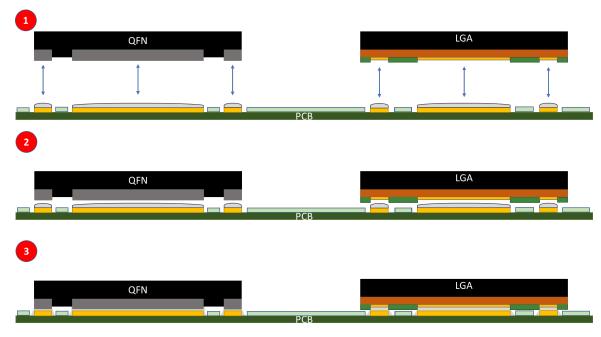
Flow for Mounting QFN and LGA Packages on PCB
